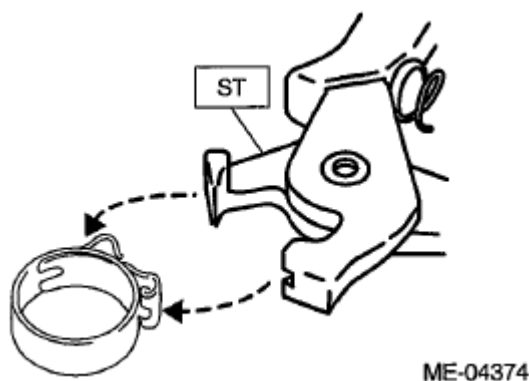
Removing/Installing PCV Hose Clamp Using Clamp Pliers
